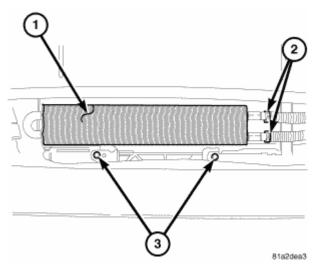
Identifying Cooler & Front Fascia Courtesy of CHRYSLER LLC
